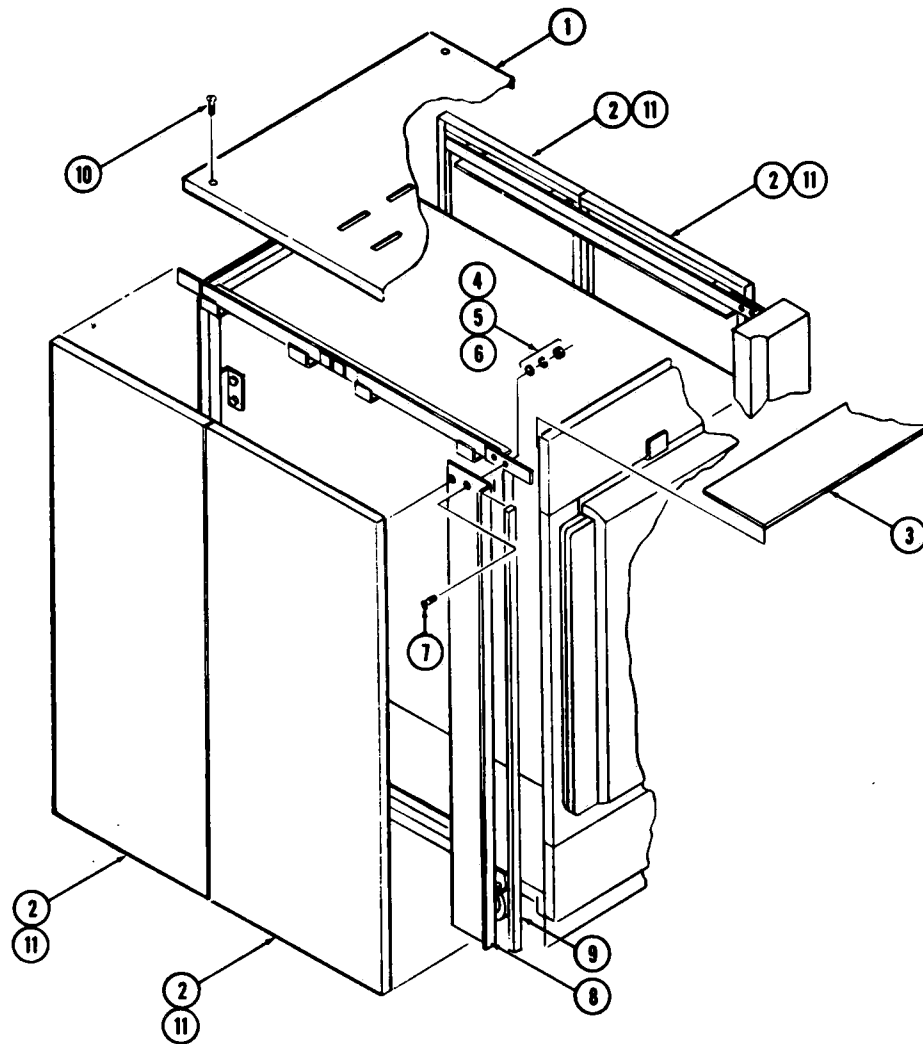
CABINET ASSEMBLY: Double Door, Recessed (Part 1 of 2).
